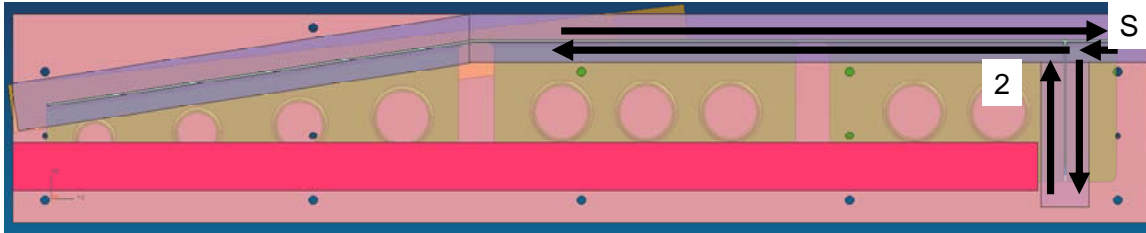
A Schematic Showing the Location of Weld #2 of Layer 1.
